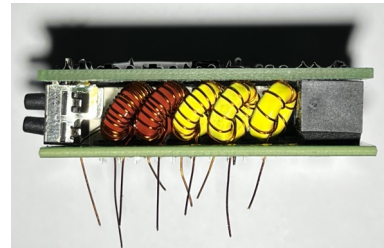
Coils L7...L3 mounted correctly on the board. There is enough space for five coils
